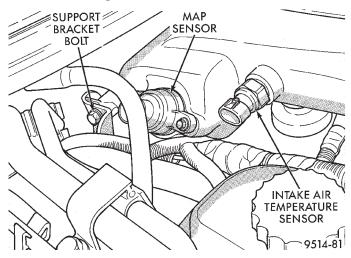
Intake Manifold Sensors and Left Manifold Support Bolt
